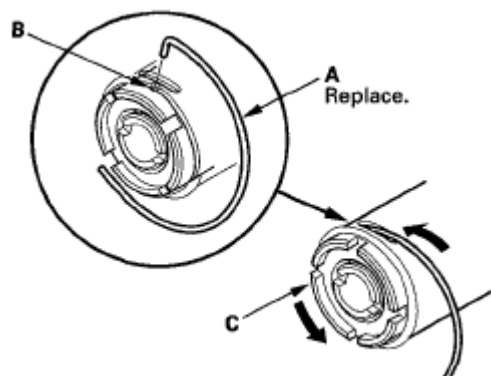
Inserting Circlip Into Hole Of Rack Stop
